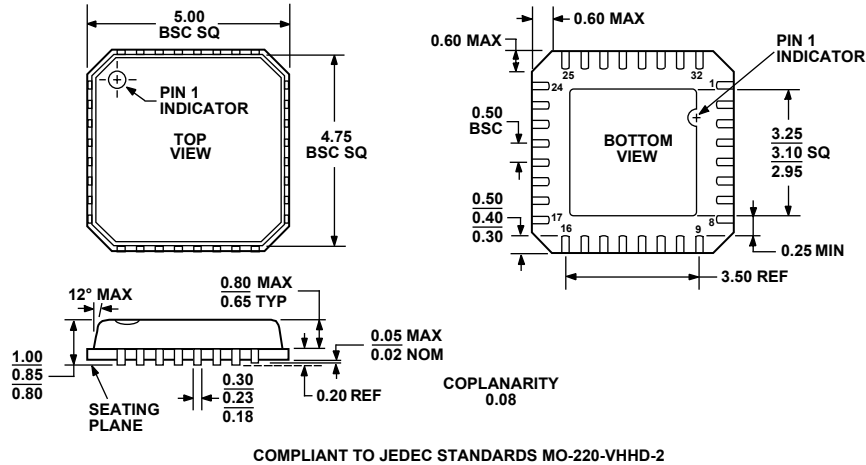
32-Lead Lead Frame Chip Scale Package [LF CSP], (CP-32)—Dimensions shown in millimeters
